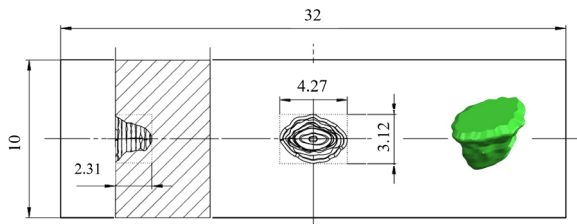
Geometry of the testing section of the fatigue test specimen with casting skin and complex artificial surface defect
